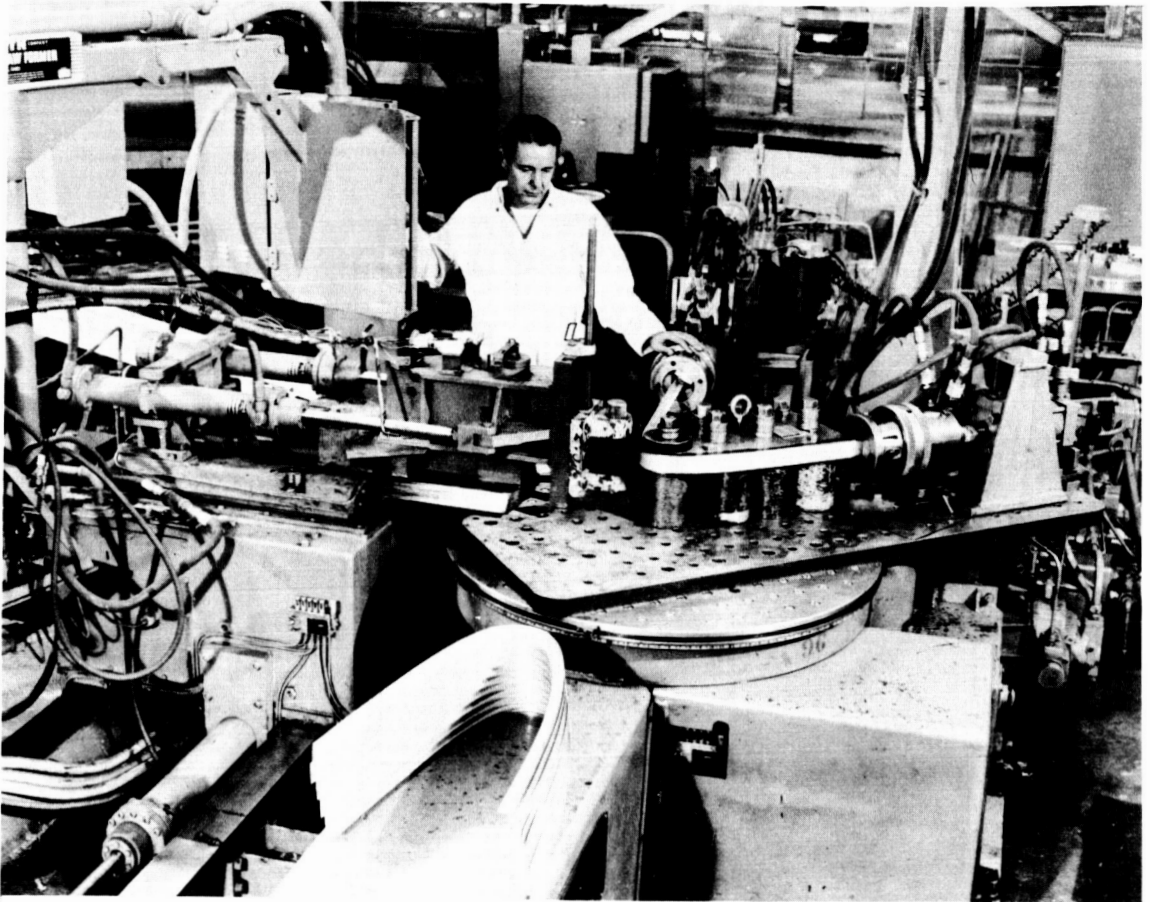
STRETCH-FORMING MACHINE FOR SECTIONING
